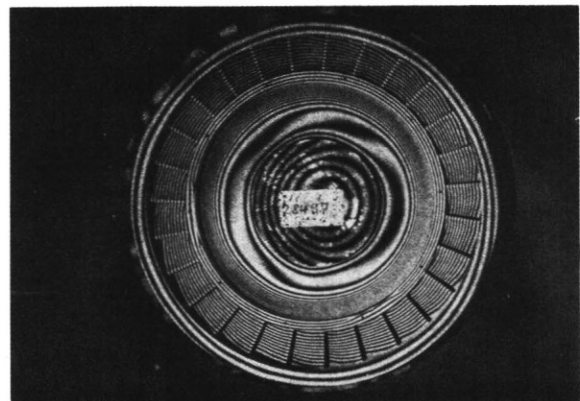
Holographic Testing of Turbine Rotors. Flaws can be identified by Inhomogeneities in the form of the frings.
